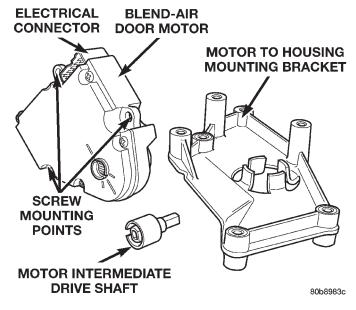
Blend-Air Door Motor, Bracket, and Shaft
